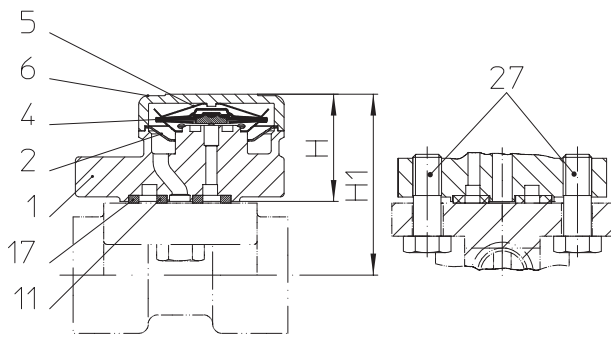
Universal-Flange with 2 x 3/8" UNC-Thread
